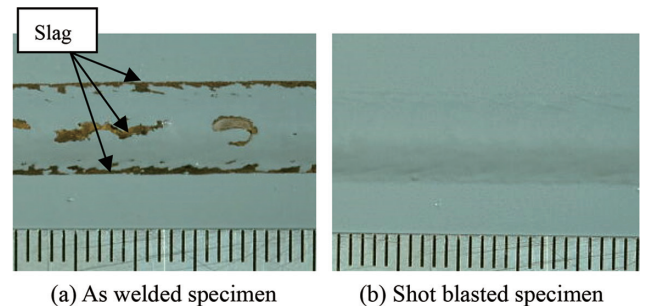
Surface of the arc welds after electrodeposition (440 MPa steel)
